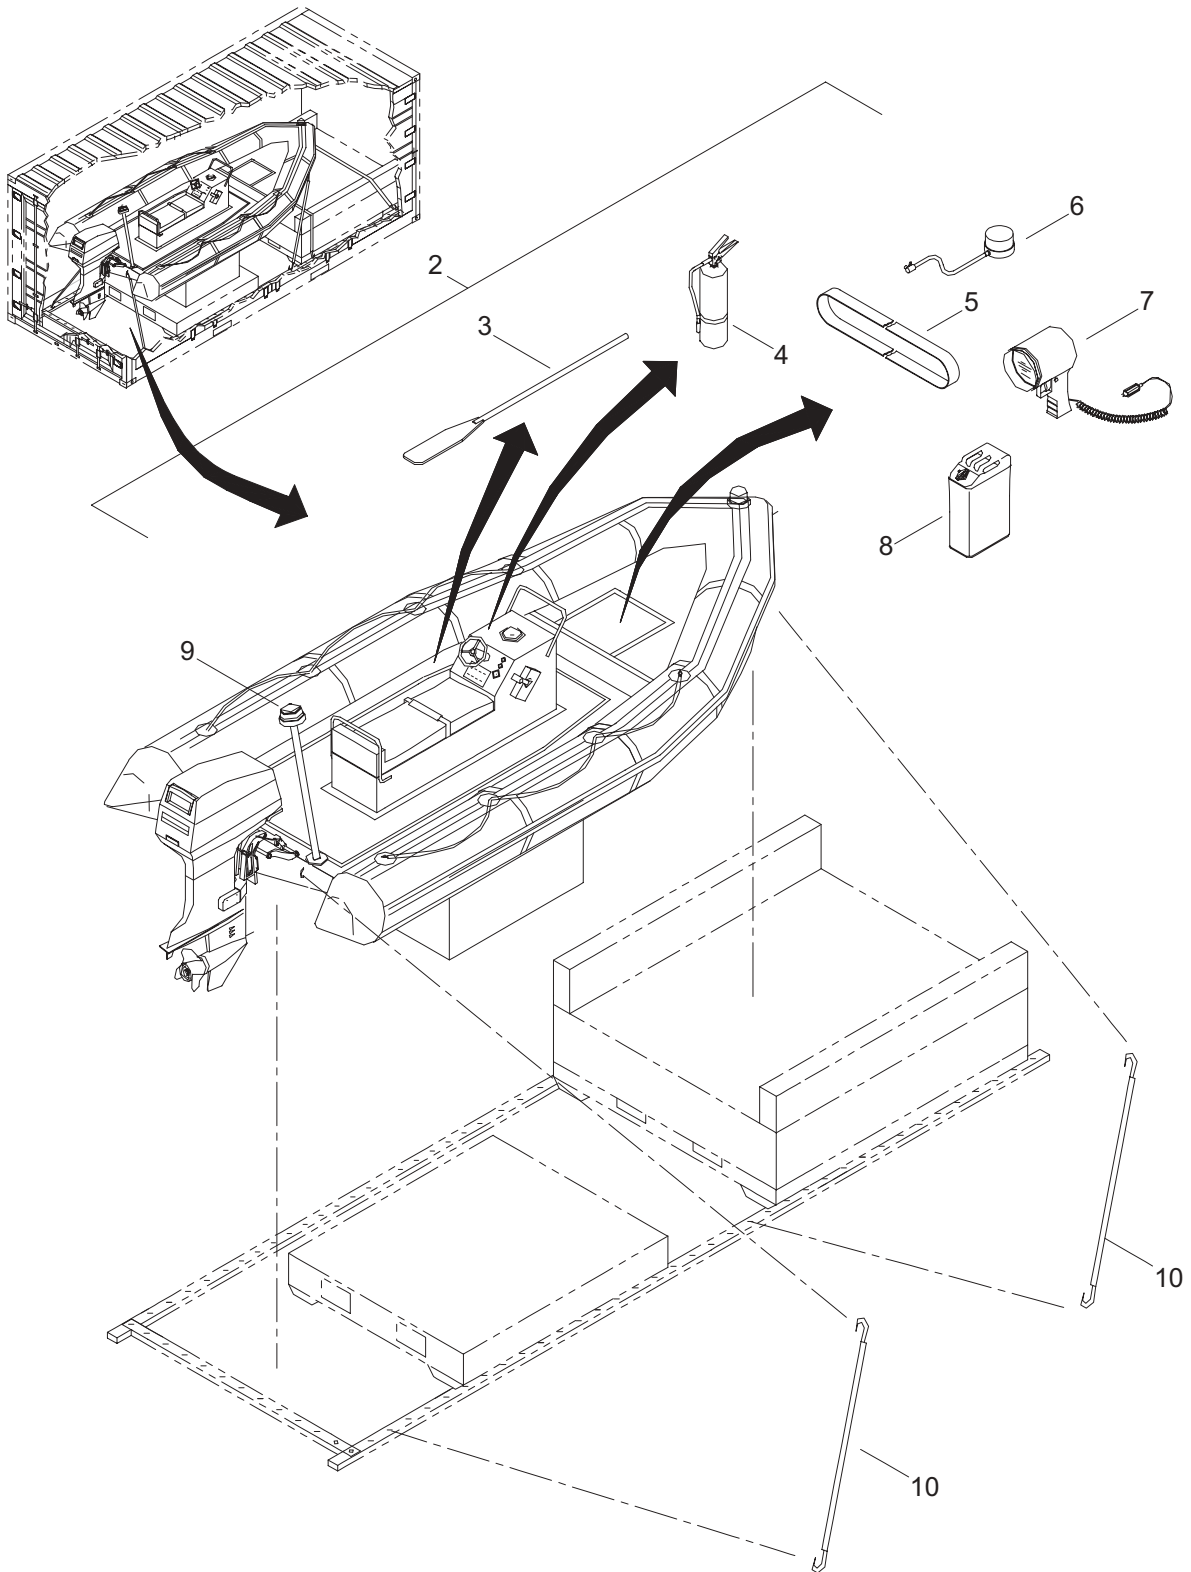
RHIB Stowage Arrangement (Sheet 2 of 3)
